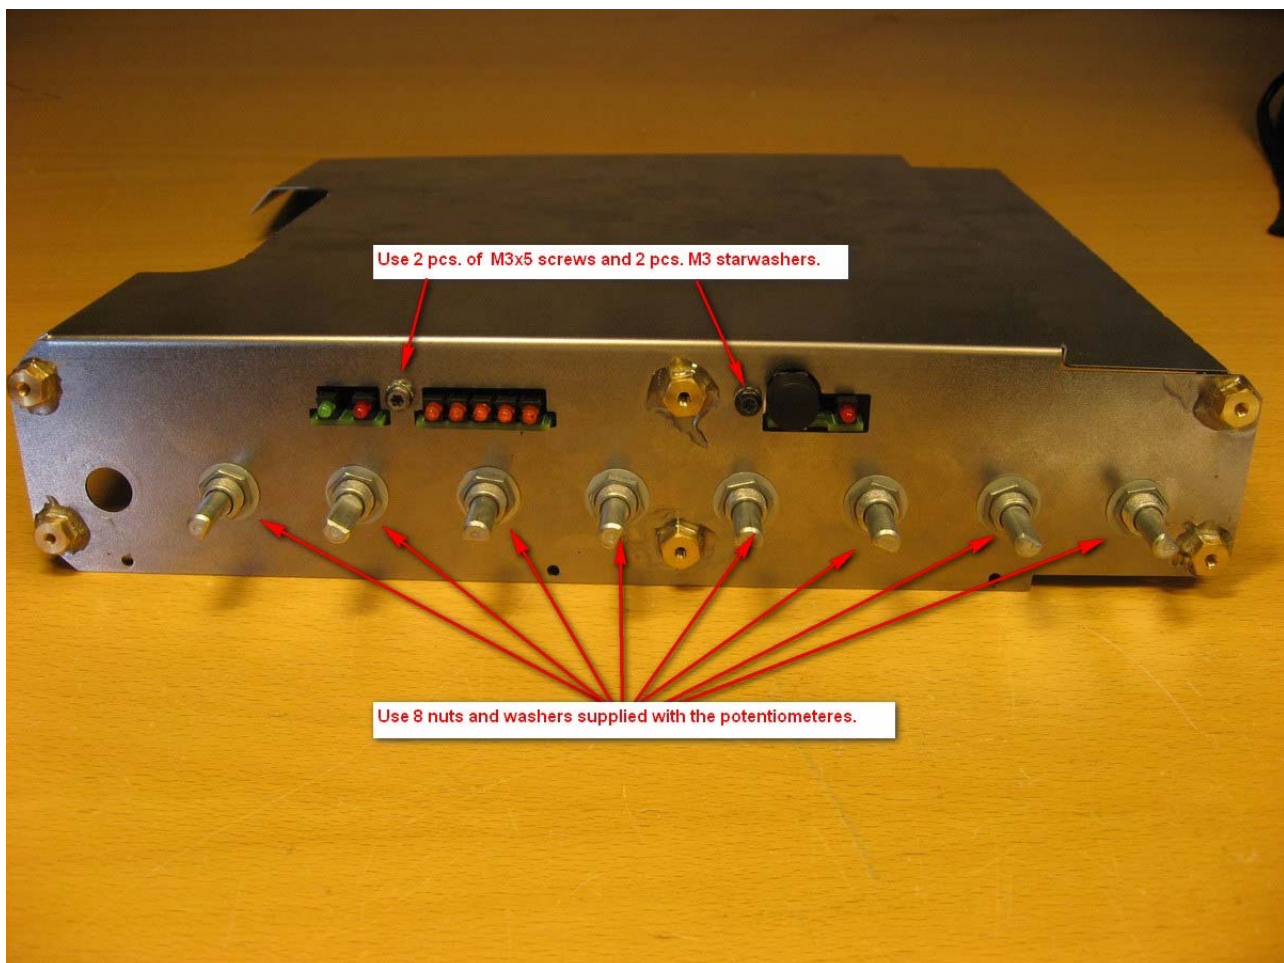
Mount PCBs in the inner box top using screws, washers and nuts as shown in the picture.
